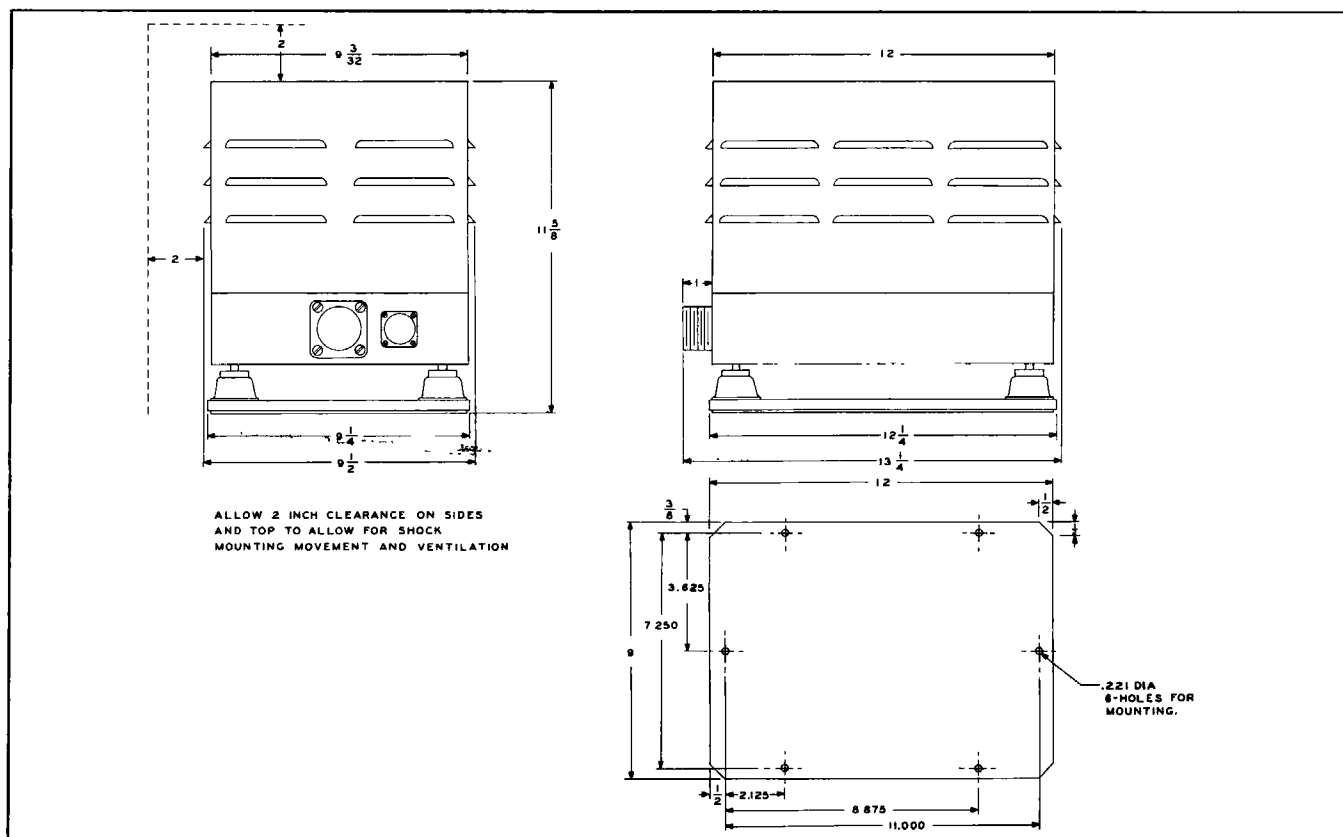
Power Unit PP-111/APS-10—Outline Dimensions
